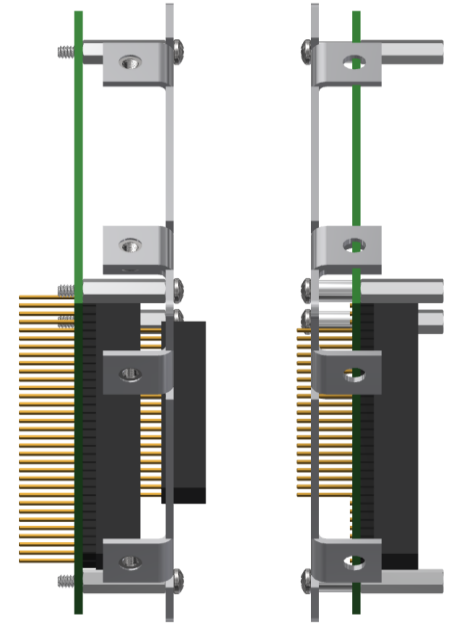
Two ends of separate PC/104 stacks in different Shells. The interface connecting them is a 20x2 pin header, extending a set of 40 pins into the next card stack. depending on spacing, one of these header pins could be used of multiple.
